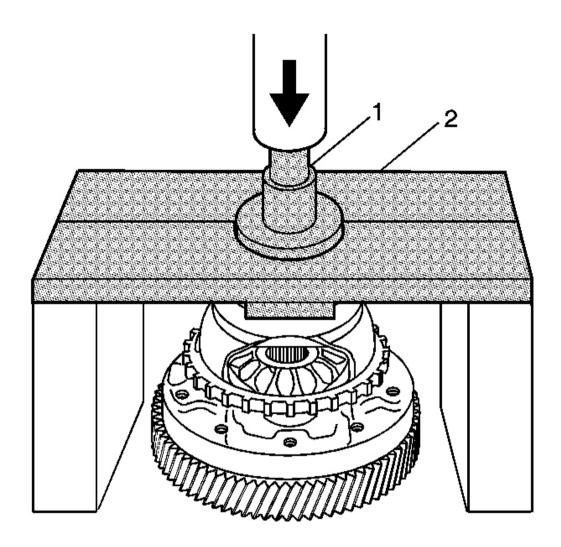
Removing Right Differential Side Bearing Courtesy of GENERAL MOTORS CORP.
